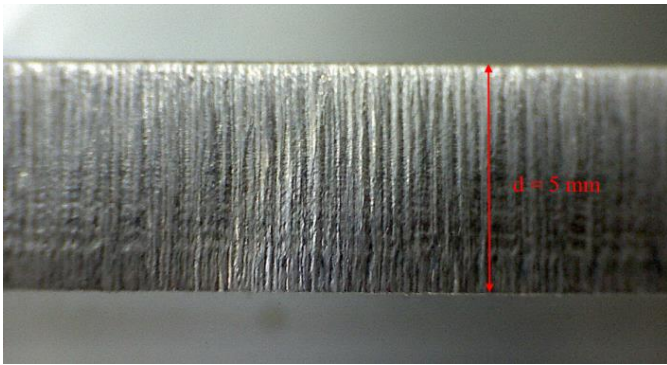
Laser cut surface at $P = 3.9$ kW, $p = 10$ bar, $v = 1.6$ m/min
